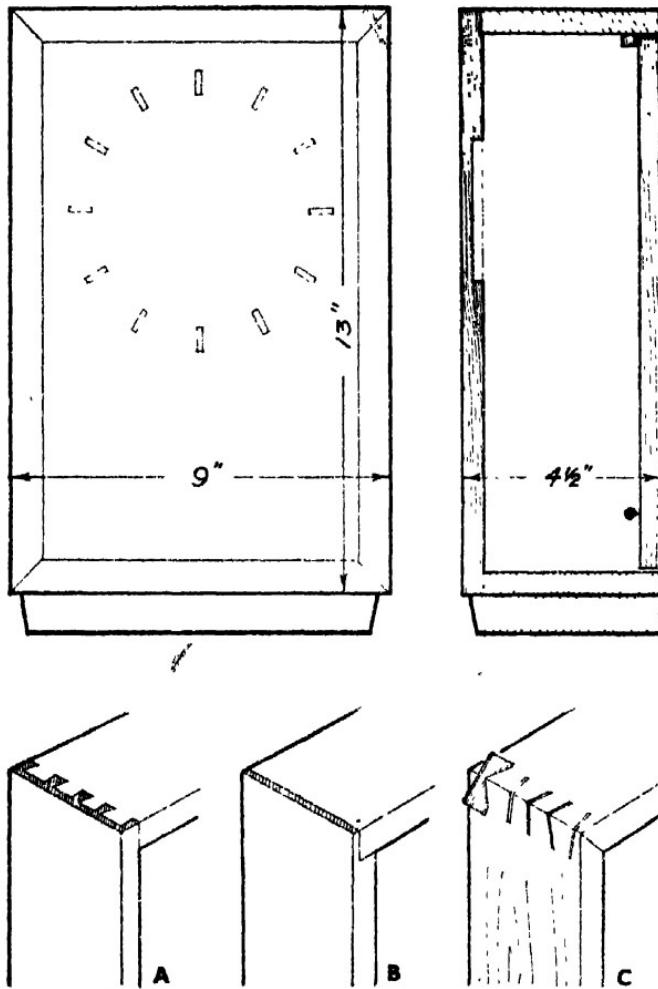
FRONT ELEVATION, SIDE SECTION, AND ALTERNATIVE JOINTS FOR TOP CORNERS.
